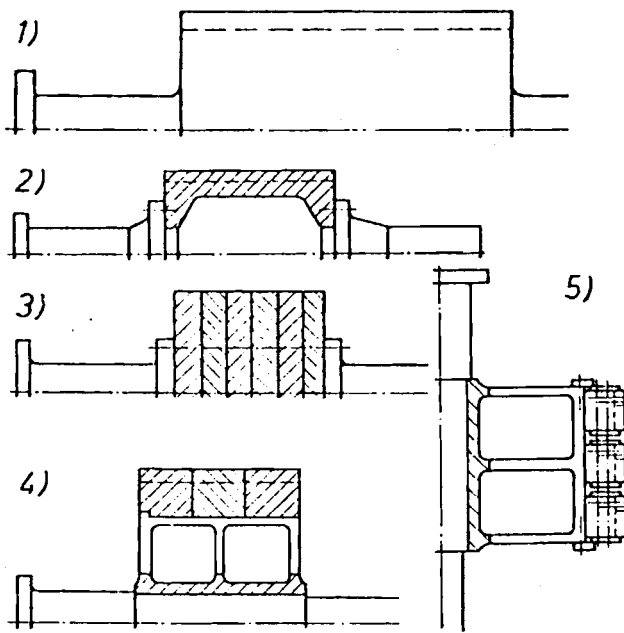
Construction of the rotor. 1 solid forged body; 2 cast or forged hollow body in central section; 3 body made of several rolled steel discs (disc rotor); 4 laminated rim rotor consisting of a spider and one or more rims formed by overlapping steel lamination segments. (Drawing from special issue BBC, see Fig. 11.4.3.)
